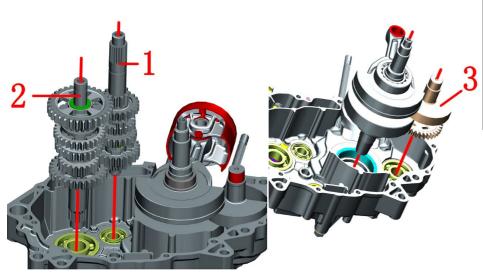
CRANKCASE		Crankcase disassembly-4	CHK
